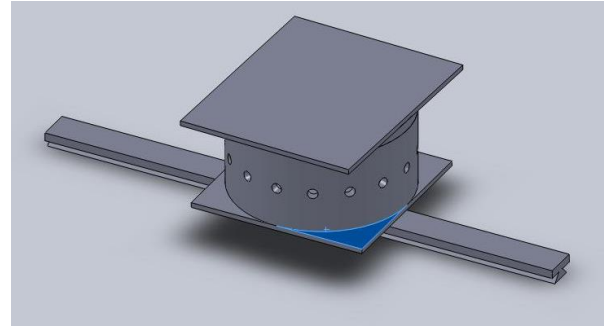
CAD Drawing of the Rotational and Sliding Seat Mechanism.
